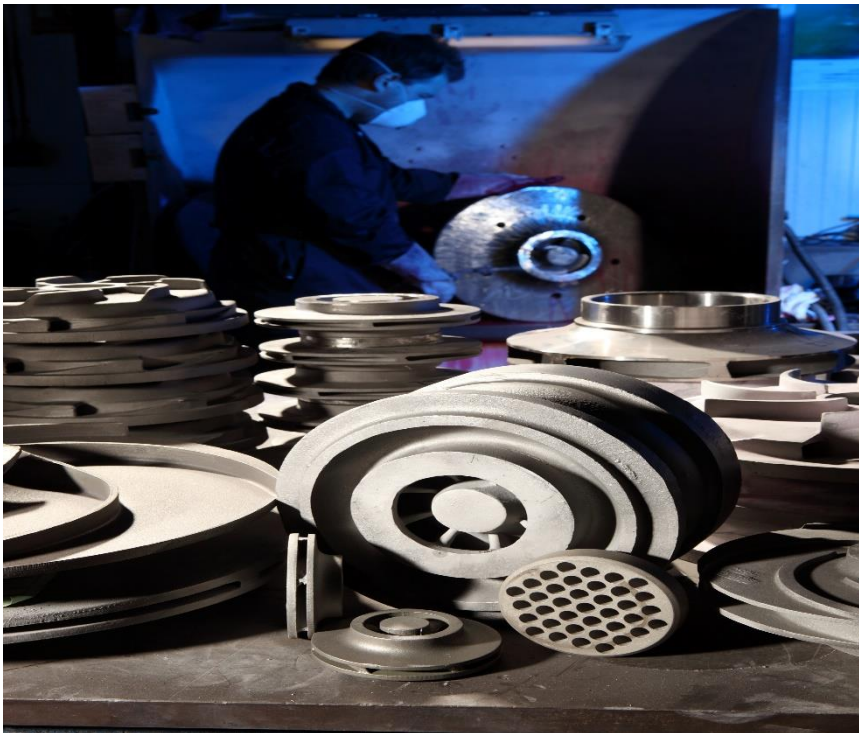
Parts produced by the Shaw Process. Courtesy of Bonds Precision Castings.
